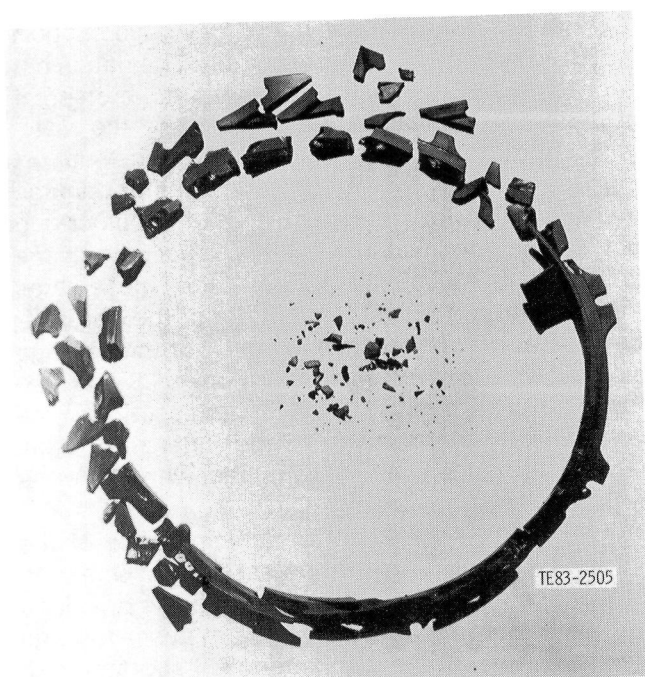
Remaining pieces of outer vane support ring after disassembly of engine C-4.
